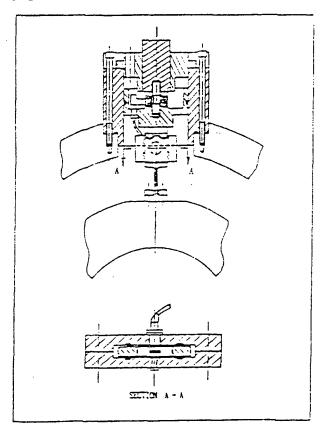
(b) New load measuring system, showing complete assembly with water-seal barrier.
